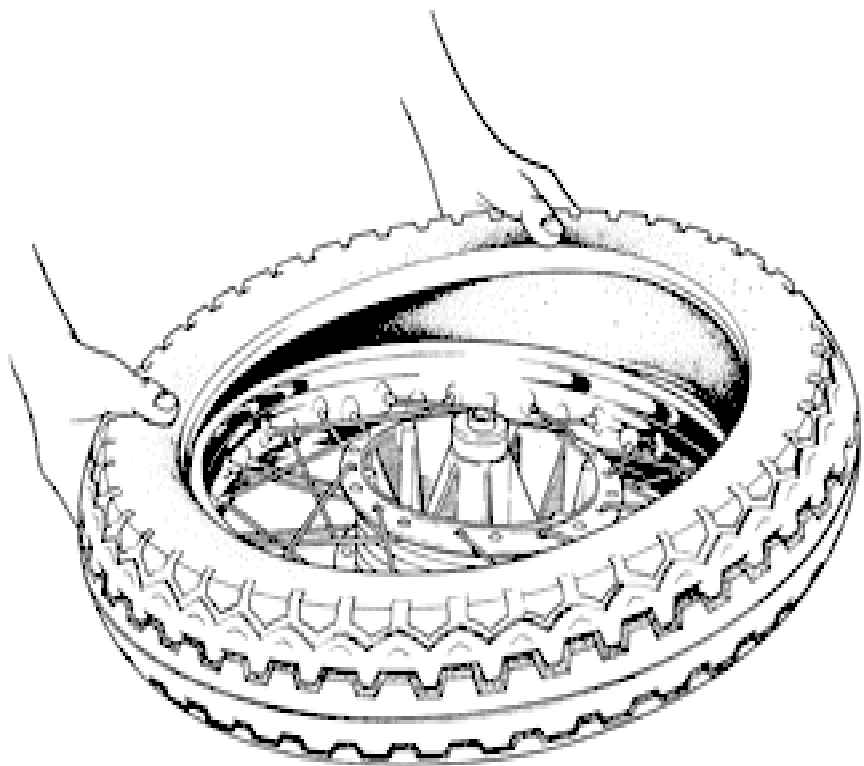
Tube within cover squeezing cover to hold valve protruding
